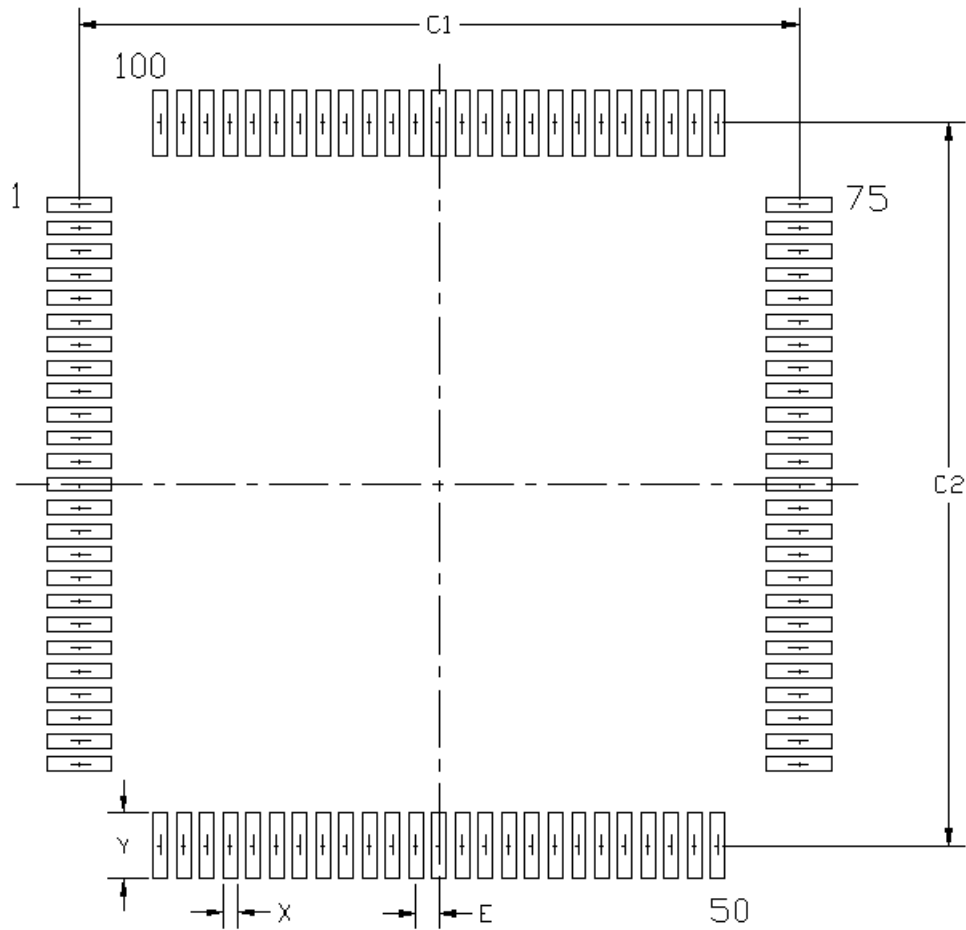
TQFP100 PCB Land Pattern Drawing
